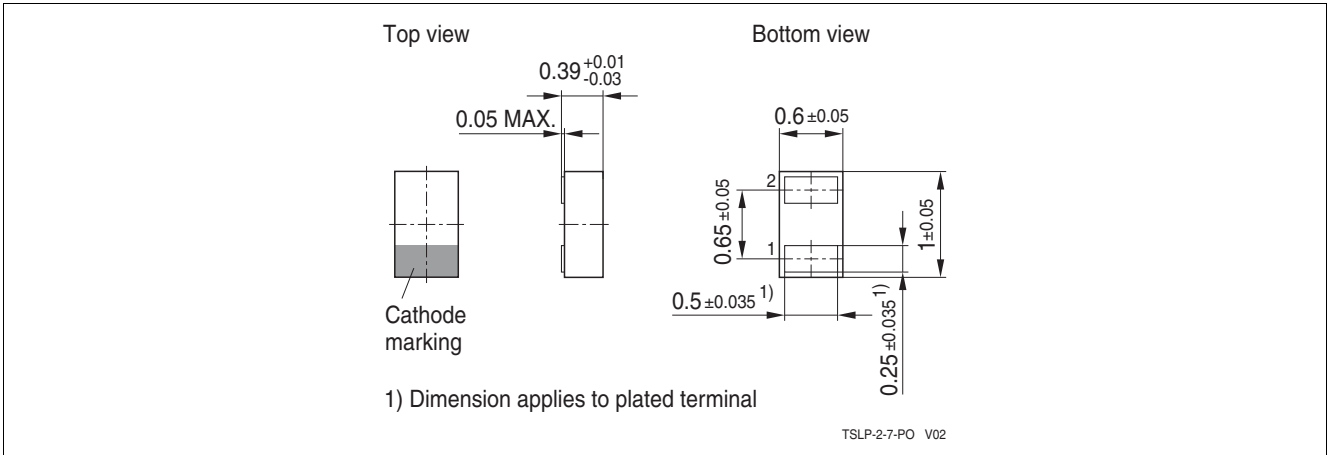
TSLP-2-17 Package outline (dimension in mm)
